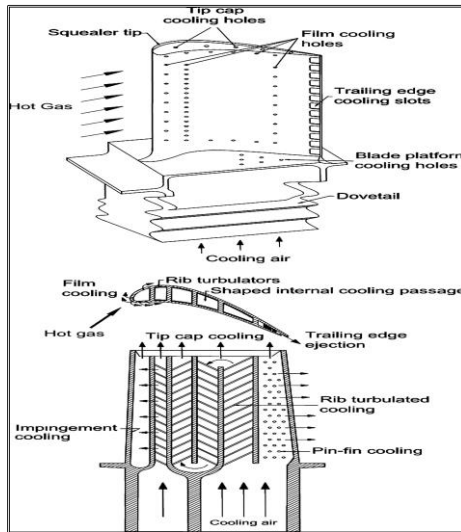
The schematic of a modern gas turbine blade with common cooling techniques
